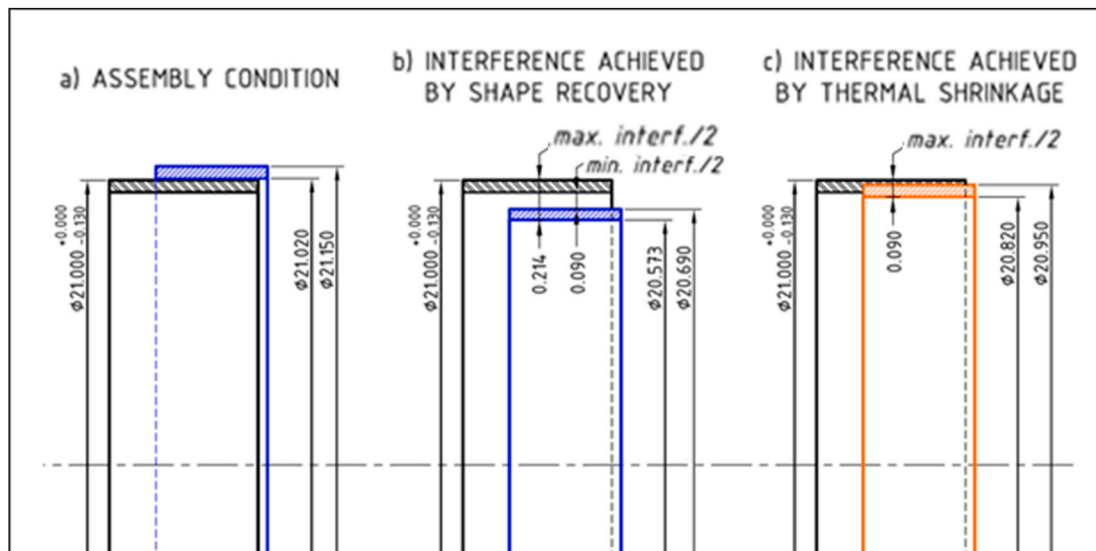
Graphic representation of tolerance ranges and assembly conditions between the couplings and shafts. The dimensional range of a $\phi 21$ mm drawn shaft is shown in black, and the dimensional range of the manufactured couplings is in blue a) Slide mounting condition. b) Interference adjustment achieved by the retransformation of the SM coupling. c) Comparative example: Adjustment achieved with a shrink-fit coupling connection heated to 800 °C (the dimensions of the cold coupling are shown in orange). (For interpretation of the references to colour in this figure legend, the reader is referred to the Web version of this article.)
